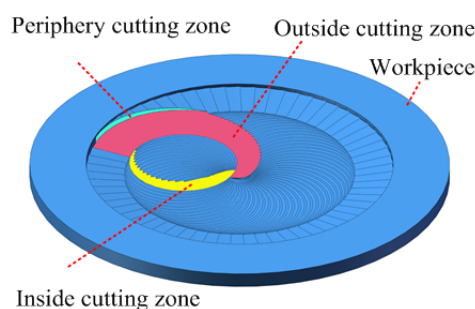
Three cutting zones between tool and workpiece during helical milling process
